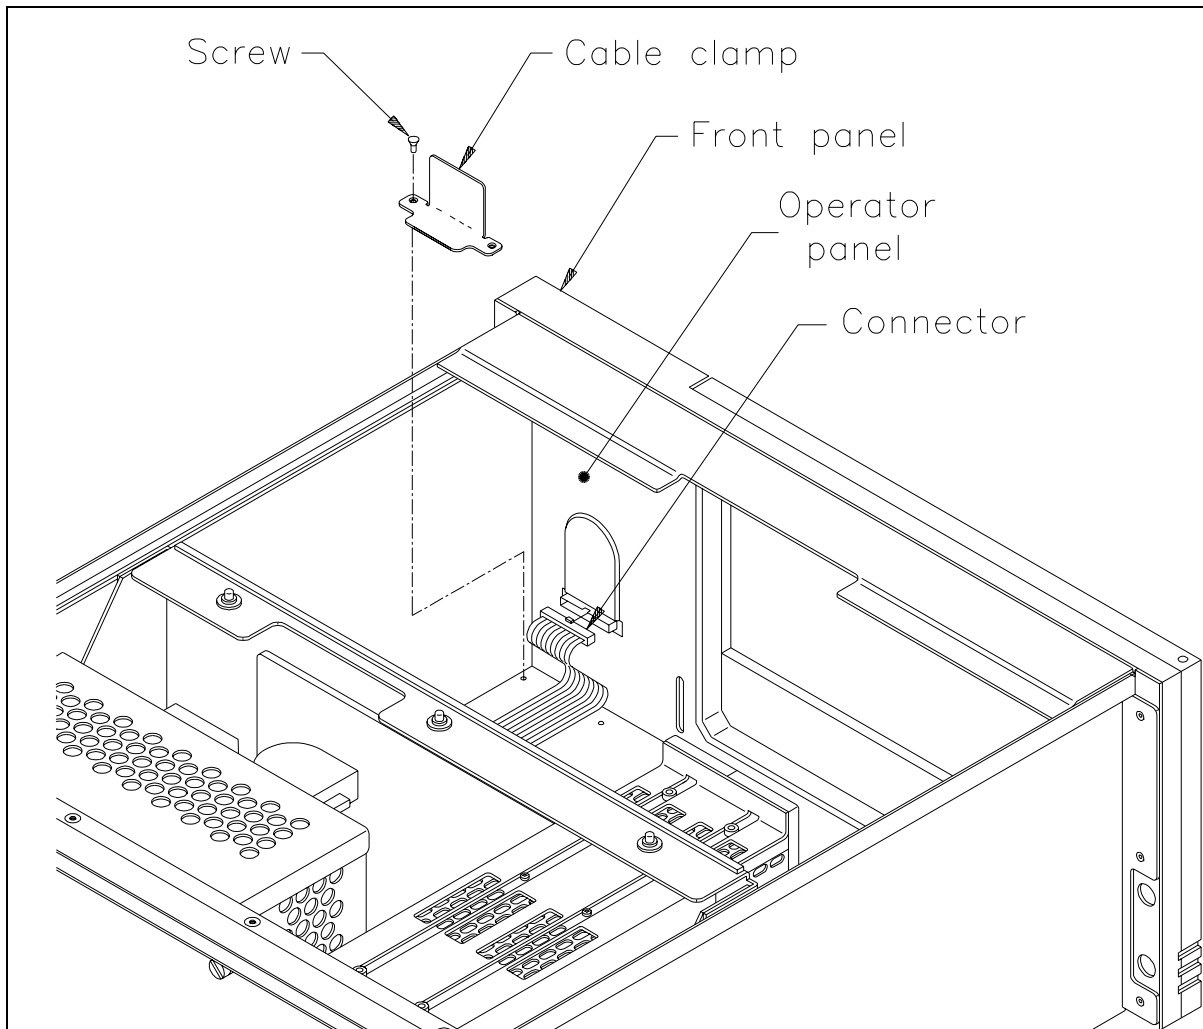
Replacing the operator panel cable on the rack-mount model
